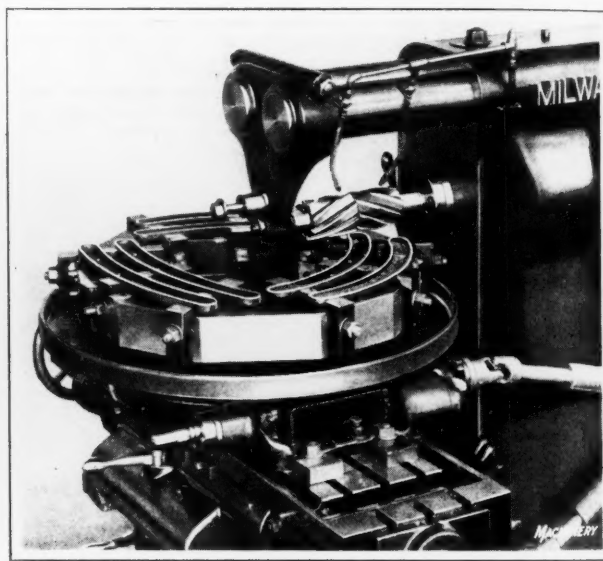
Use of Spiral Slab Mills in Conjunction with Rotary Milling
